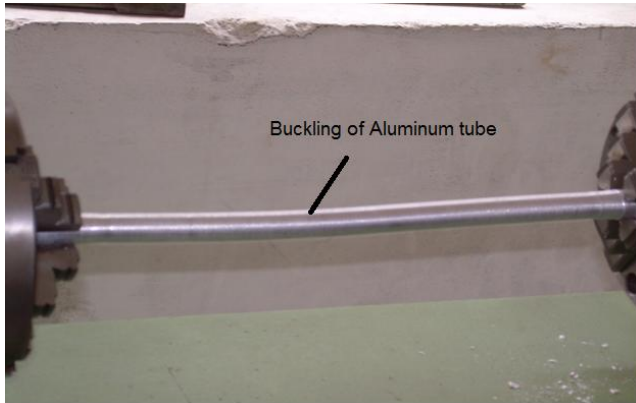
Torsion testing machine holding hybrid drive shaft specimen
